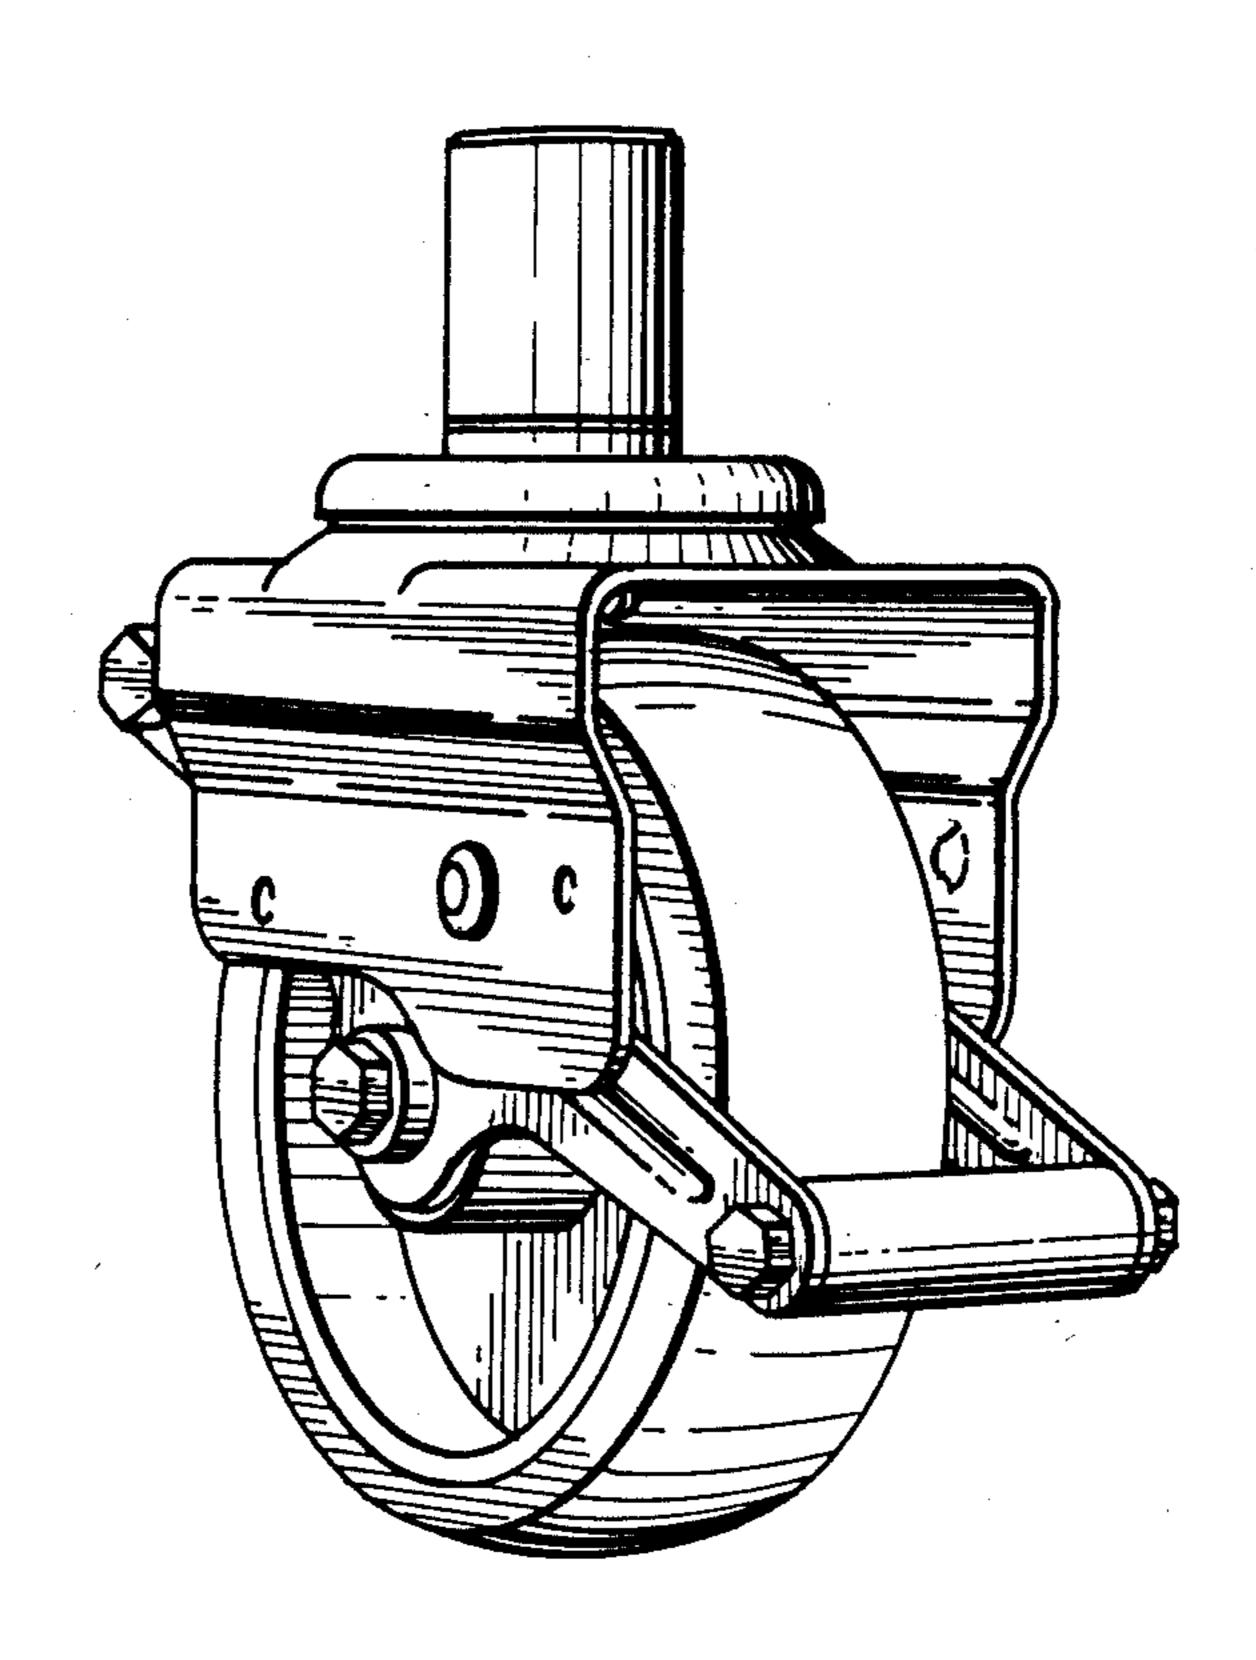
is a left side and front perspective view of a castor showing our new design in a front position;
